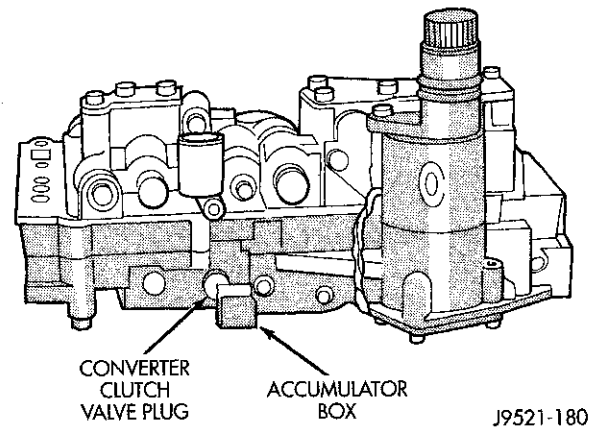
Seating 3-4 Accumulator On Lower Housing
